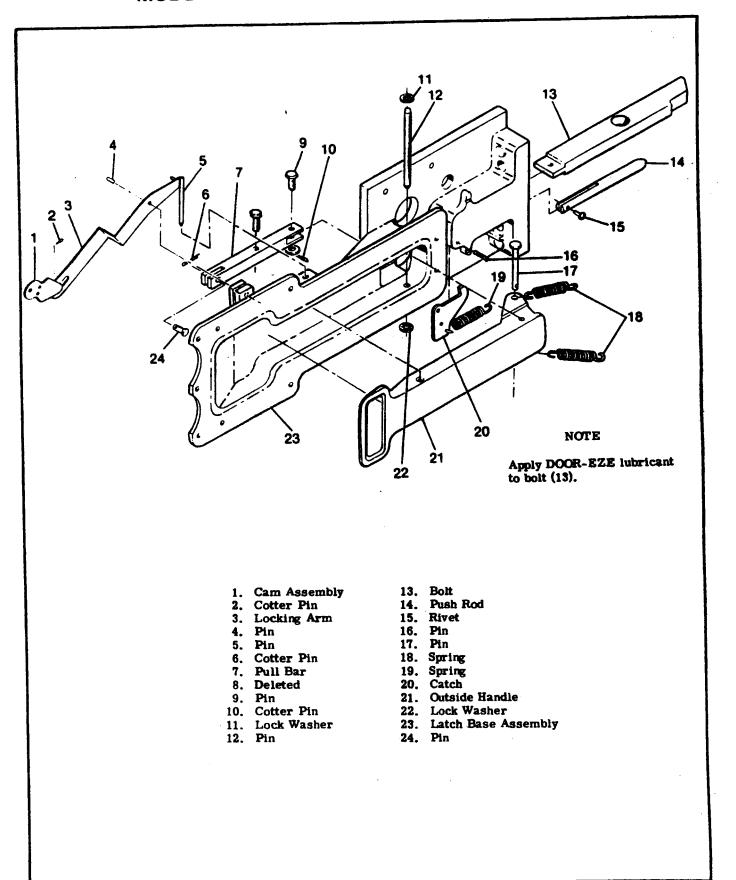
A. Cabin Door and Latch Assembly (Sheet 1 of 3)
